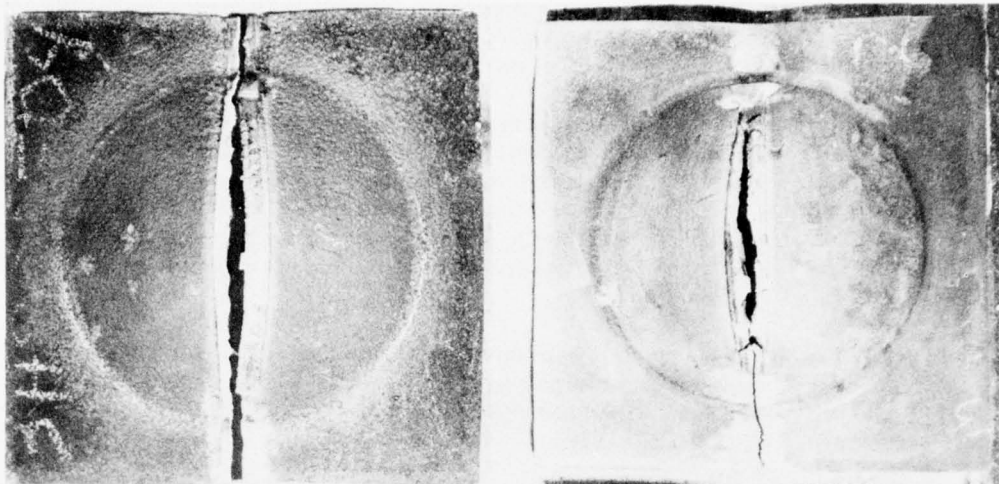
Explosion bulge tests of $30 \times 30 \times 1$ -in. ($75 \times 75 \times 2.5$ -cm) weldments of high strength steel, showing fractures of heat-affected zone and weld.
